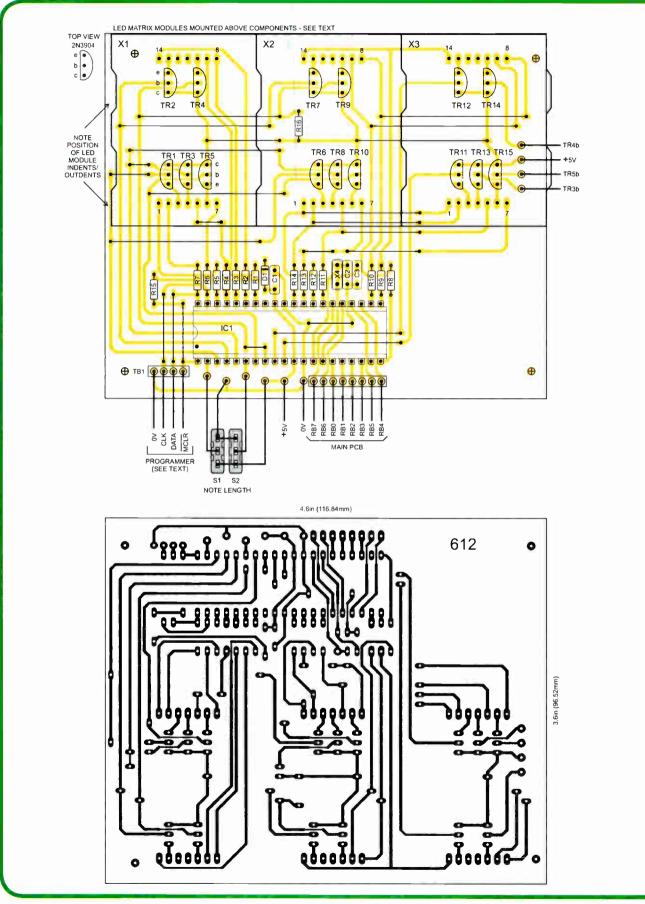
printed circuit board component layout, full-size copper foil master and off-board wiring details for the LED Display Interface
